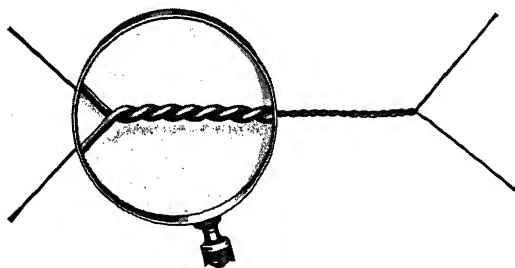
Test for enamel wire. (Courtesy of Belden Manufacturing Co.)
